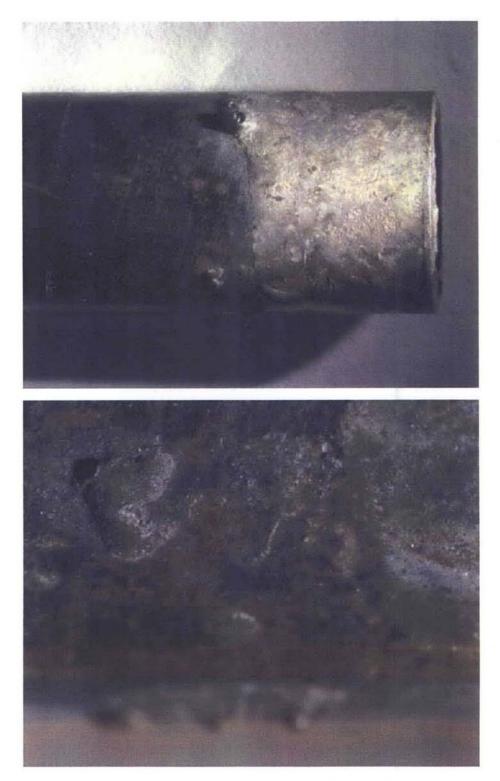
Stereomicroscope images of Joint Section 3 showing the solder remaining on the outer surface of the copper tube.
